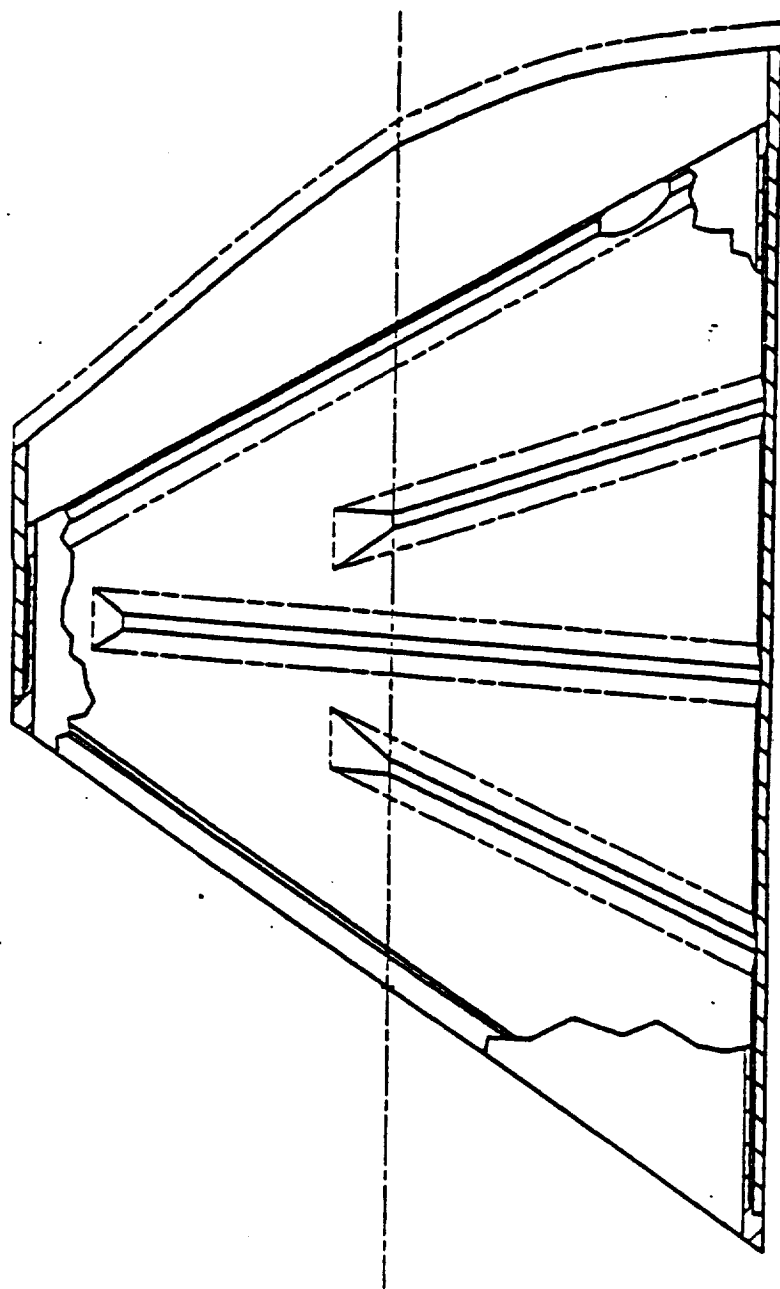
New HGM Liner Design with Integrally Machined Motion Limiters
